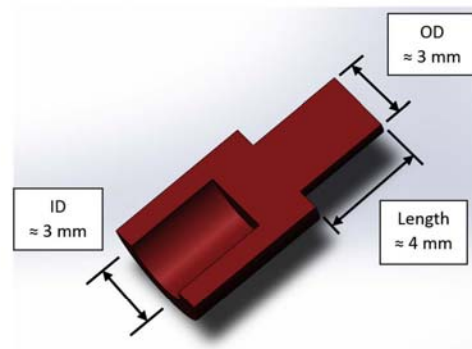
CAD cross-section view of the dimensional artefact showing the measurement distances.
